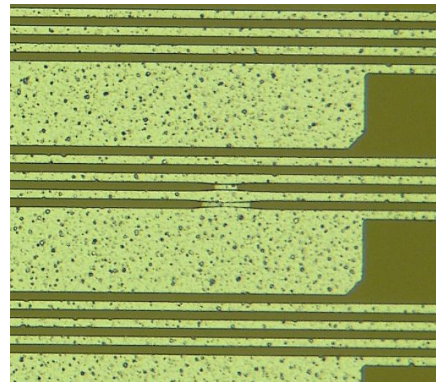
Short circuit on a wire bond adapter caused by incomplete etching.
